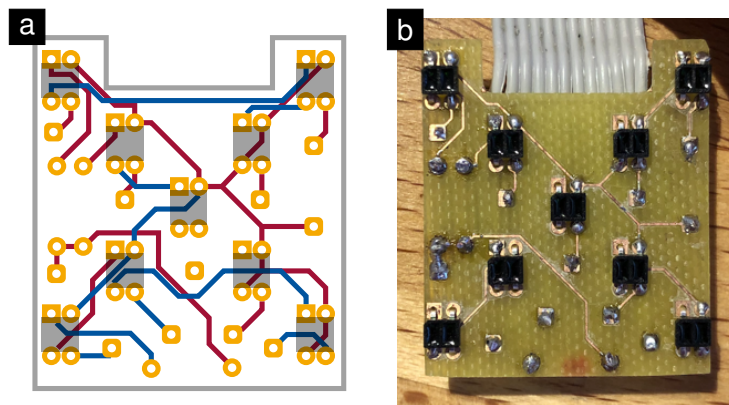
(a) PCB design for Tilt-Watch. Traces are marked red or blue according to the side they are on. (b) Picture of double-sided PCB with sensors. Three sensors are connected in series respectively.
